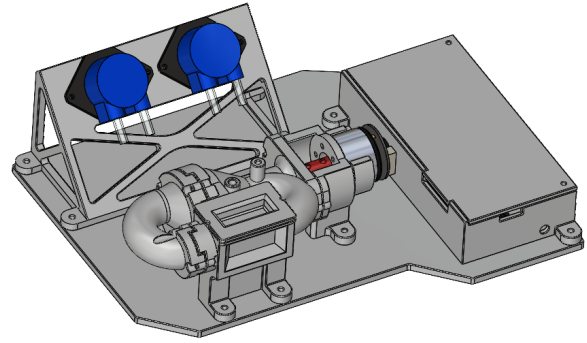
Main mounting plate with all associated sub-assemblies mounted to it.
